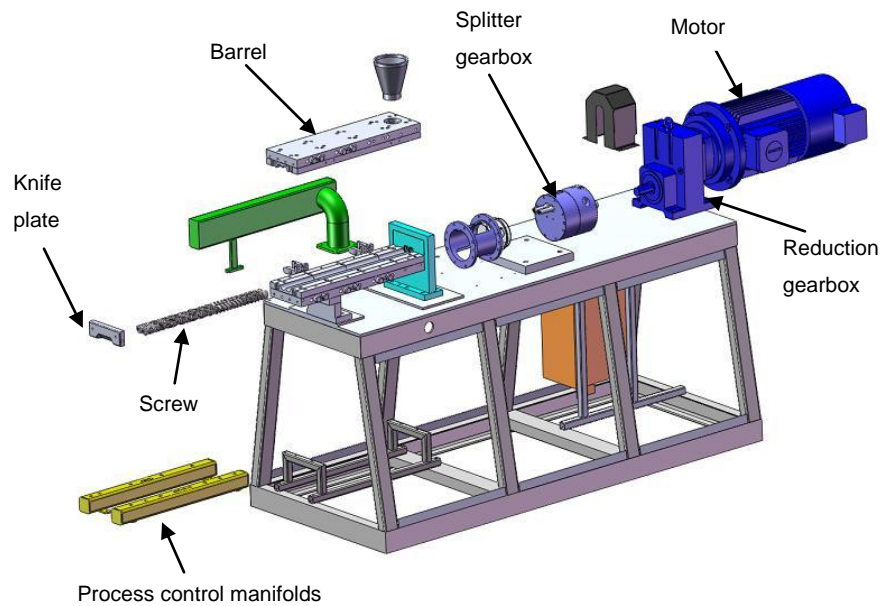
Exploded view of 28mm twin screw extruder (CFAM Technologies (Pty) Ltd, 2011).
